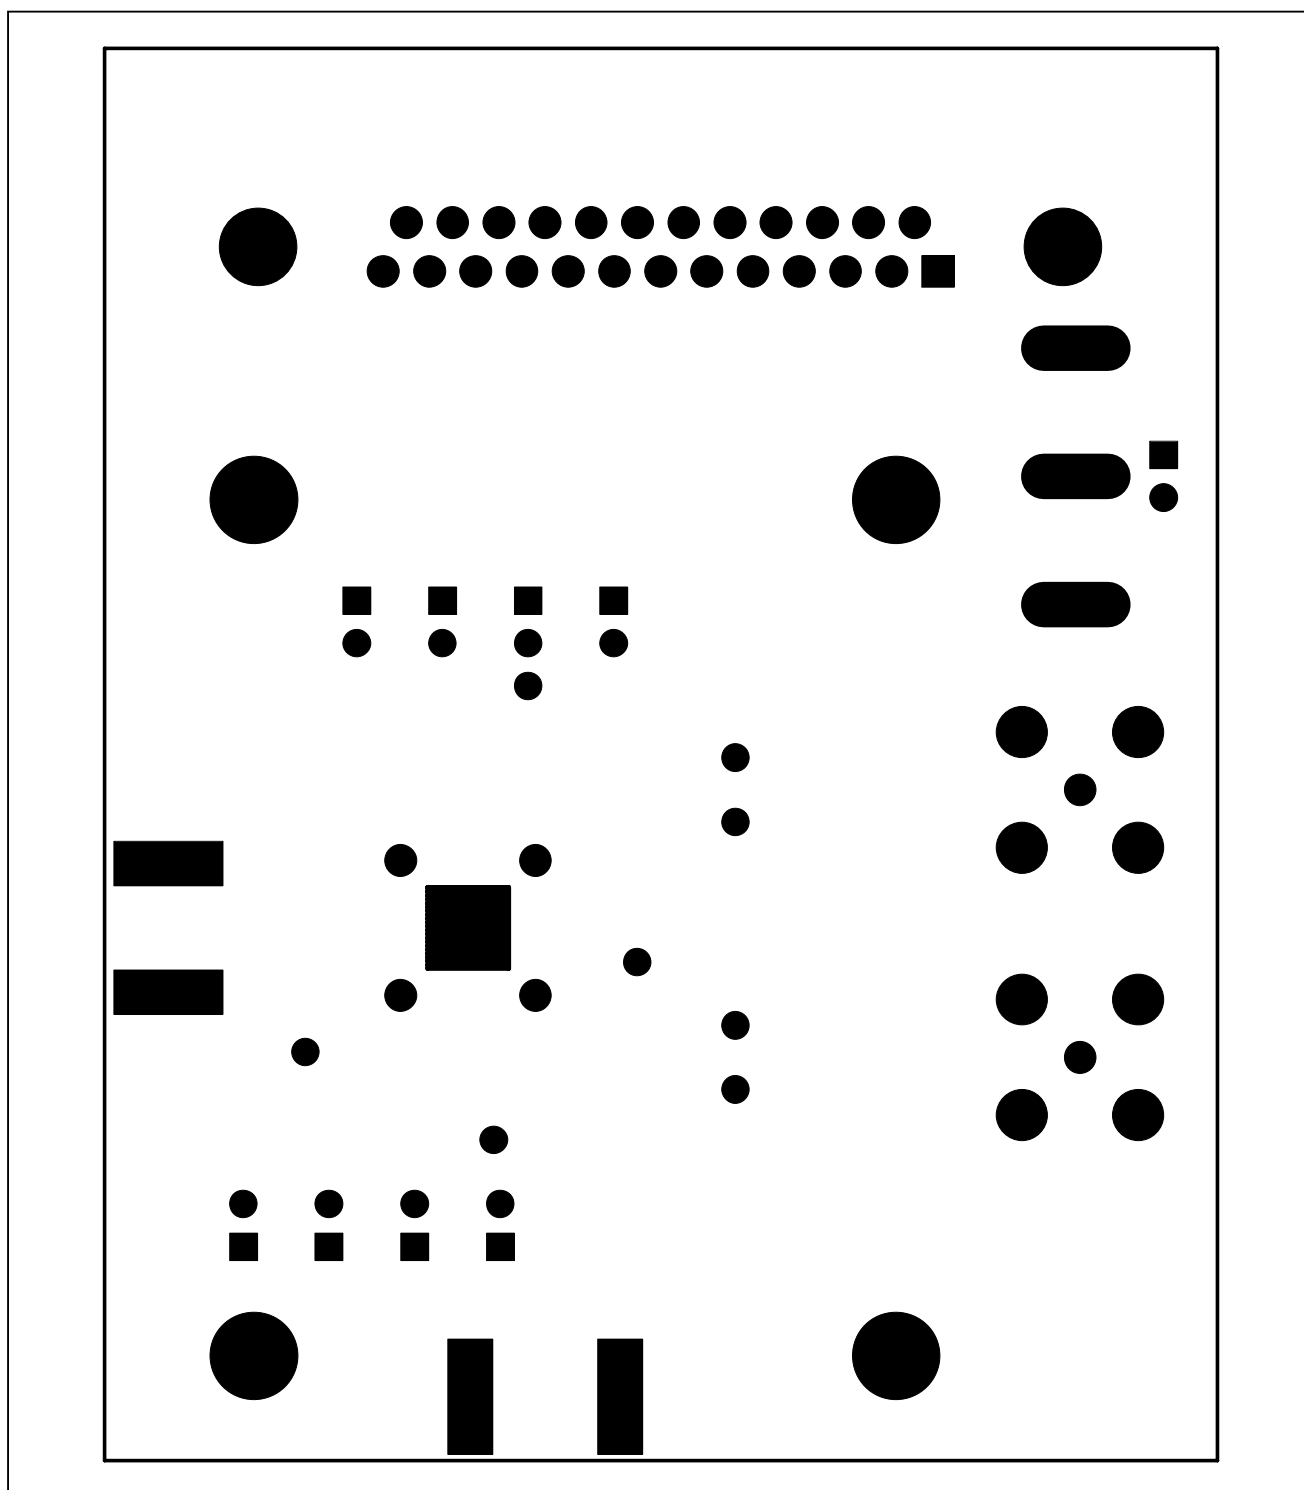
MAX2117 EV Kit PCB Layout—Bottom Soldermask
